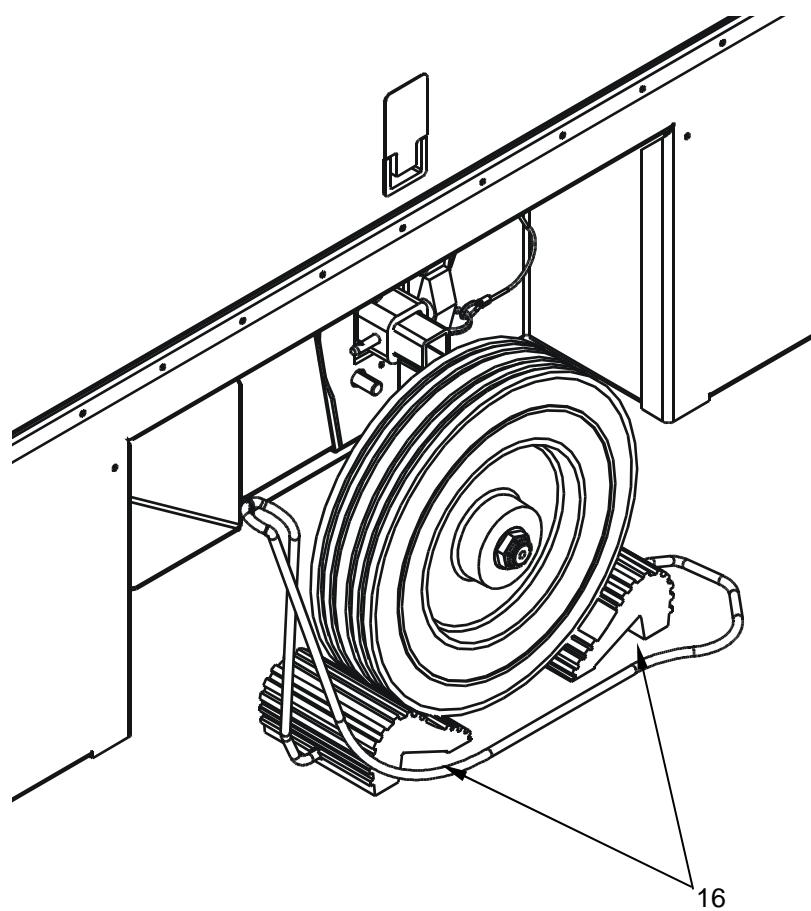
Wheel Chock Assembly (Sheet 5 of 8).
